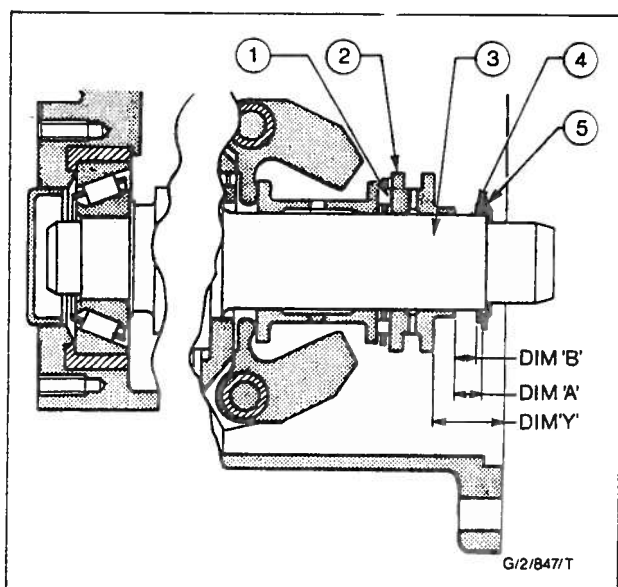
Checking Dimensions 'Y', 'A' and 'B'
